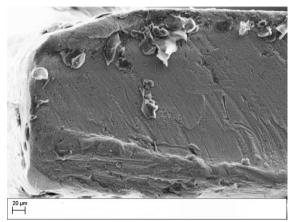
Topography of aluminium printing strip after cutting on industrial guillotine. Visible cracks in the Al₂O₃ layer.
